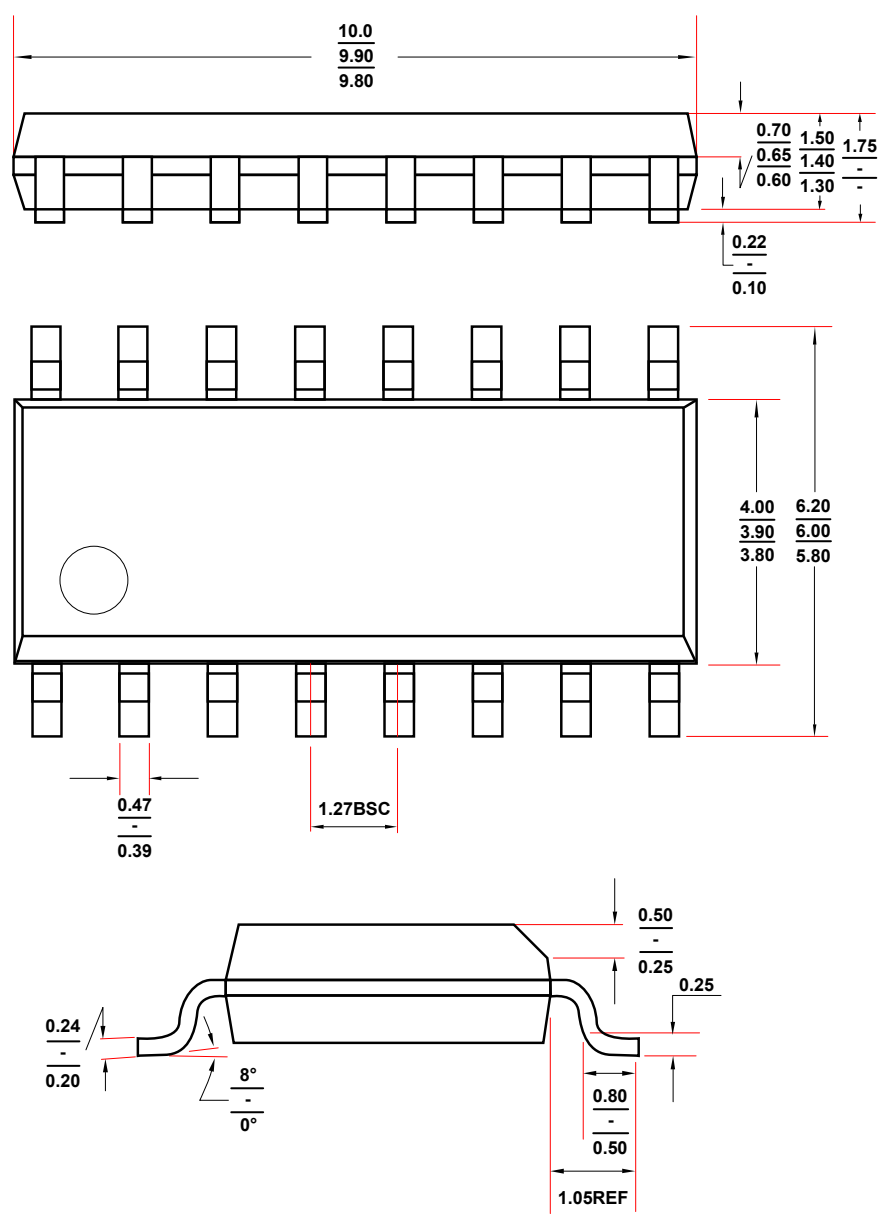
16-Lead SOIC Package Dimensions Shown in Millimeters
